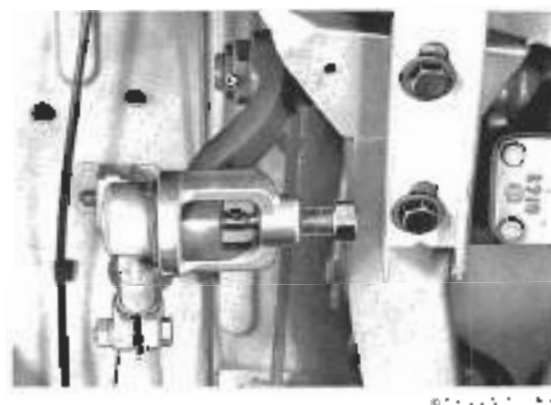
Drag link end being pressed out. The drag link is shown being pressed out of the steering gear (drag arm), but the same tool should be used to press it out of the relay lever.
